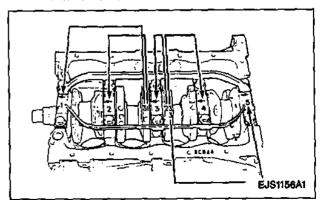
Stamped Numerals on Crankshaft Web of No. 2 and No. 3 Cylinders
